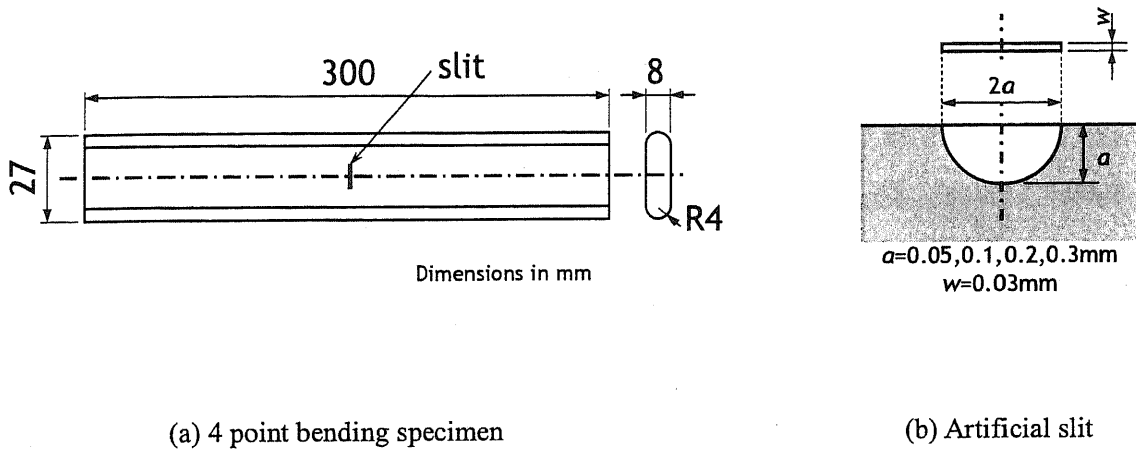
Shape and dimensions of specimen and crack-like slit.
